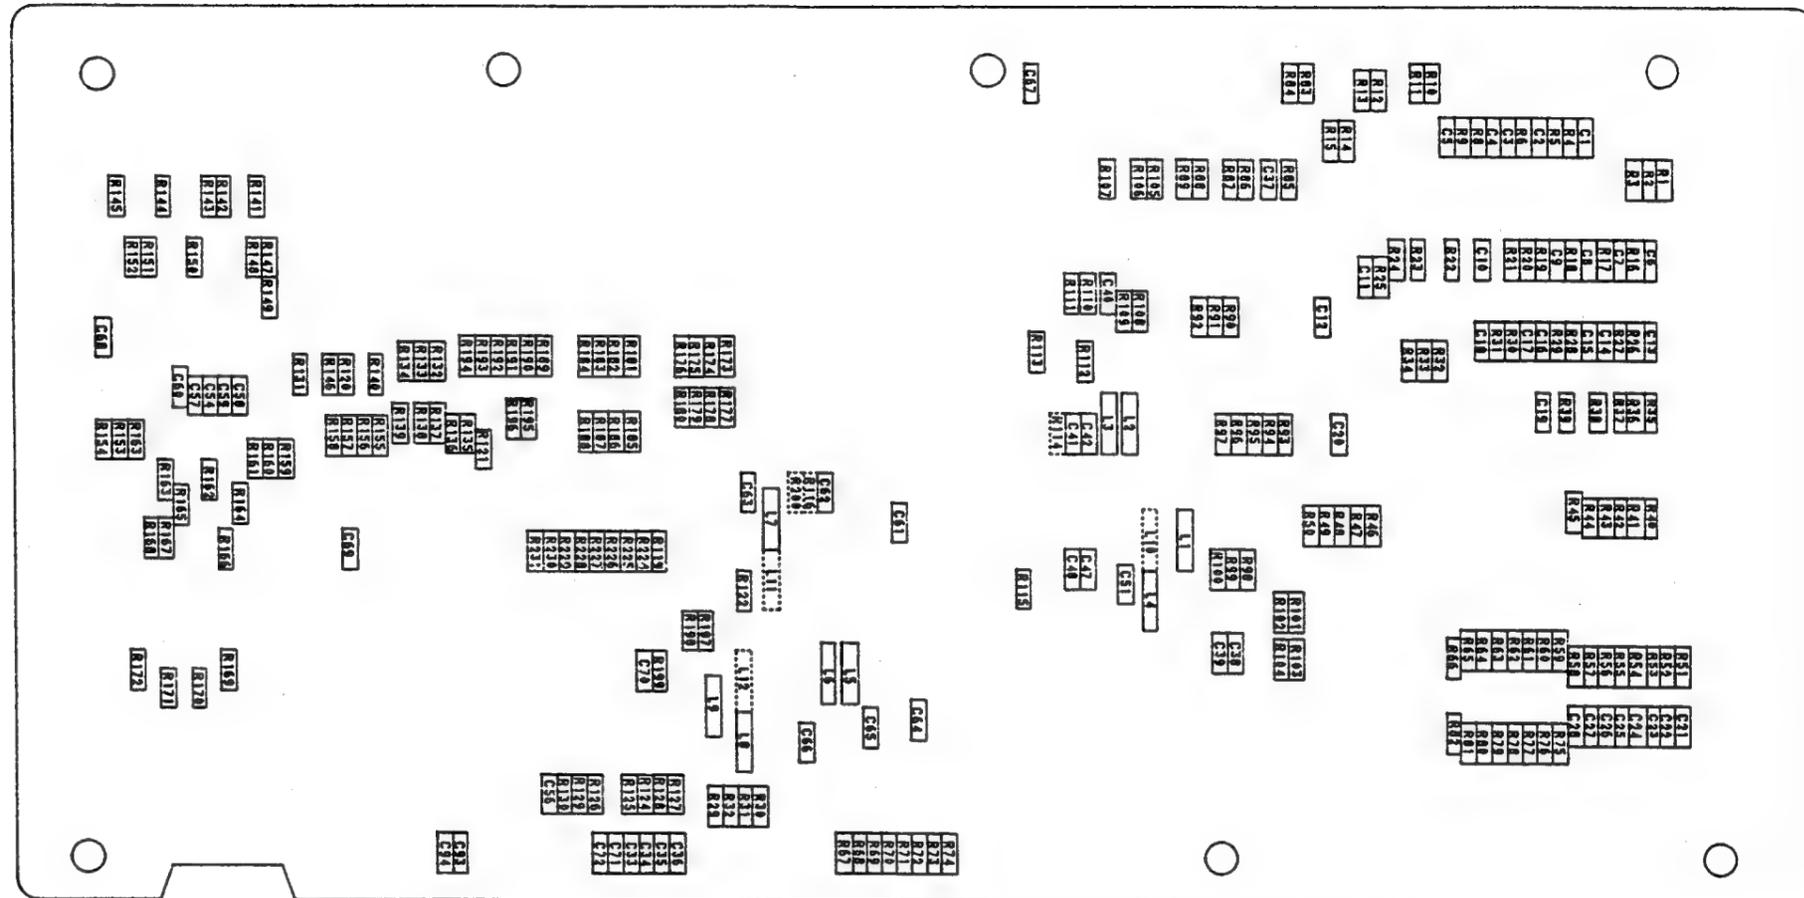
G8ESRA PCB Assembly (Component Side)
